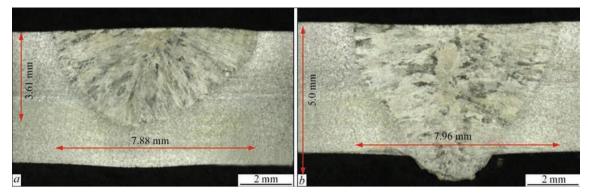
Shapes of welds in TIG welding. a — with direct current; b — with HFP modulation of the welding current a refractory cathode increases. The purpose of this work is to determine the shape and parameters of the welding current pulses that are optimal according to the criterion of the maximum force action of the modulated current on the metal of the weld pool.
